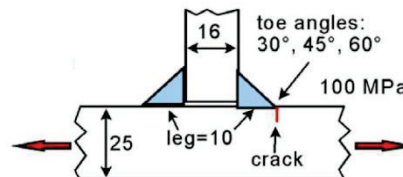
Problem 2: weld toe crack of thick transverse attachment (Hobbacher 2013)
